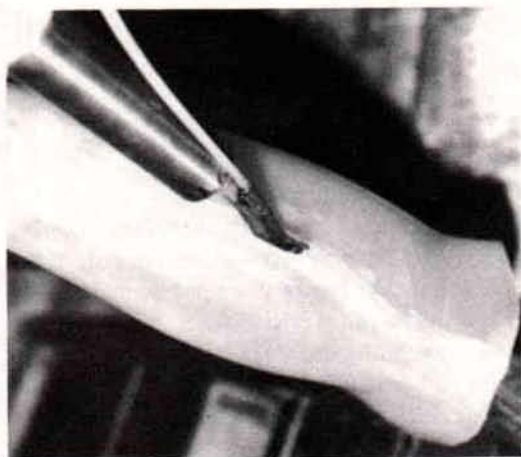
The rod is fed through the tube in the high speed tip. The proper amount of heat and speed are the critical elements of good plastics welding.
